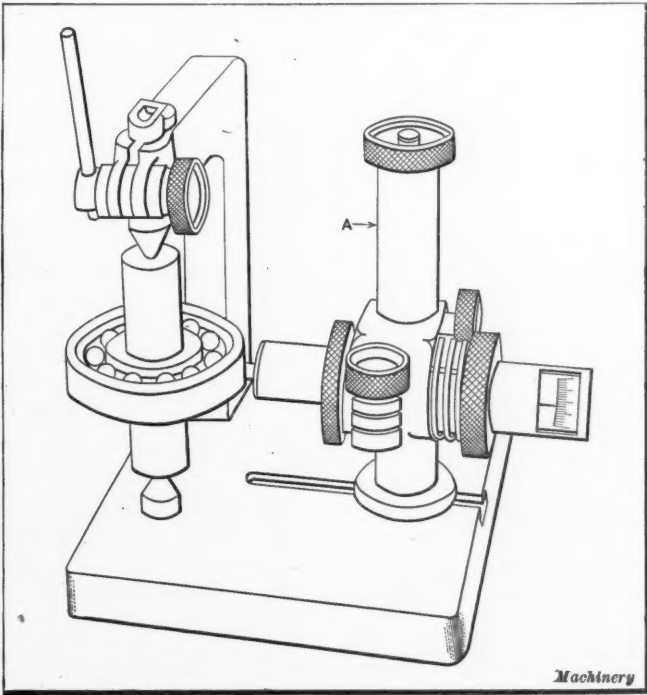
Special Inspecting Fixture for testing Side Wobble and Concentricity of Assembled Ball Bearings
